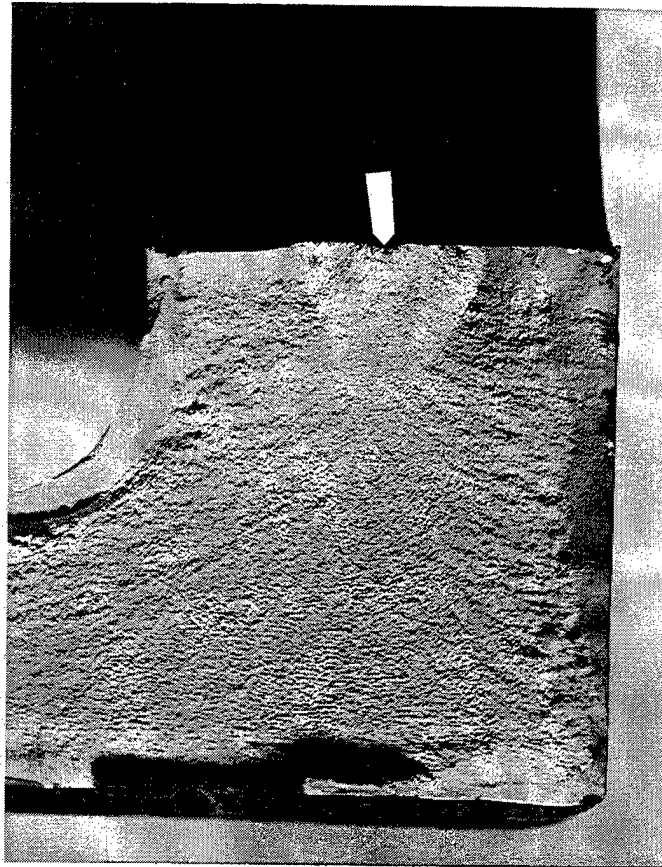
Close-up view of the origin failure (arrow) in Figure 14. Although not clearly seen in the photograph, a small area of discoloration that may be indicative of corrosion was observed in the fatigue crack at the eyehole edge. This was where the fatigue crack had initiated, growing to the critical size during fatigue cyclic loadings to the point of brittle fracture in the forged bottom connector across the eyehole section.
